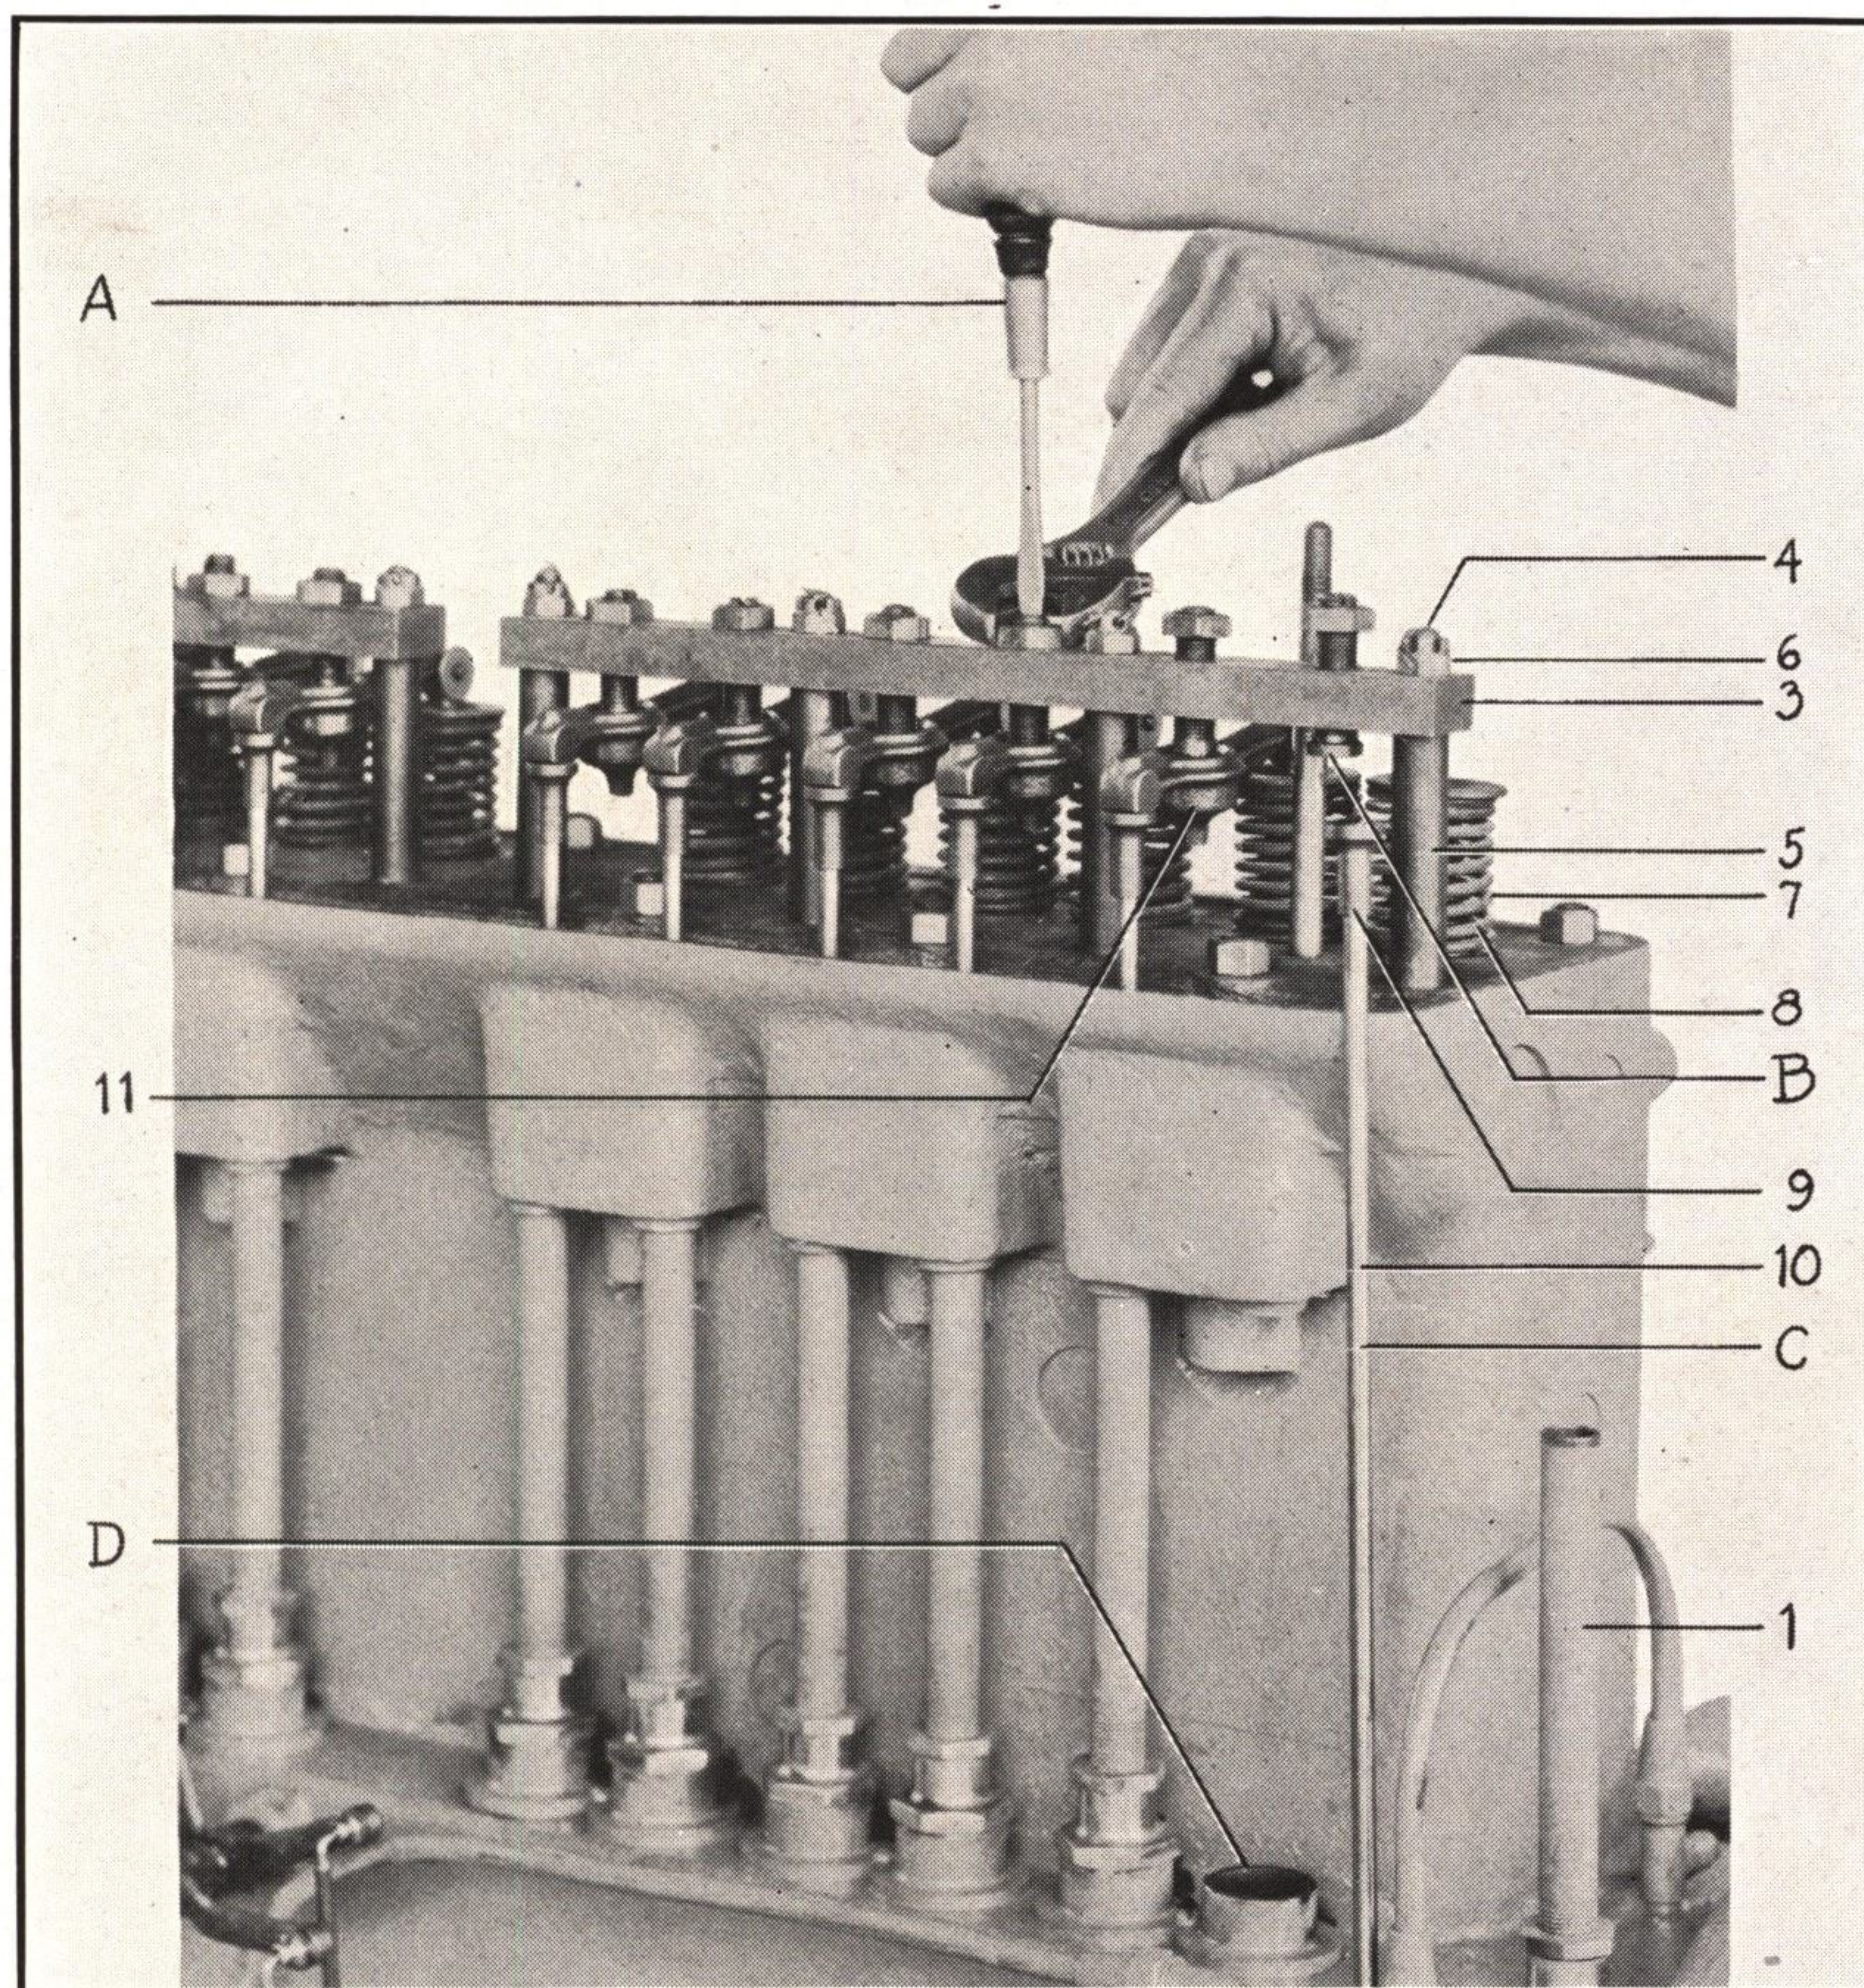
Adjusting Rocker Arms and Removing Valve Tappets
